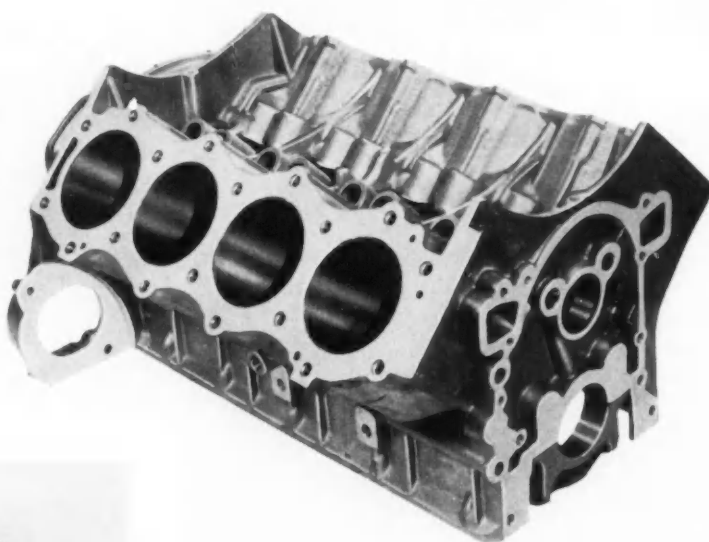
Oil-pan mounting surface is 2.25 in. below the crankshaft centerline in new Buick aluminum engine.
